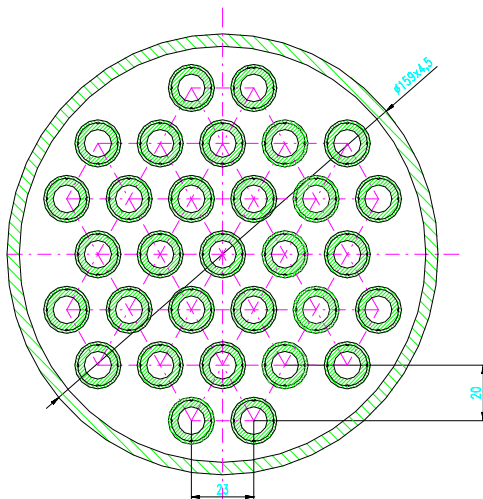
Arrangement of Tubes in the SG Shell Tube.
